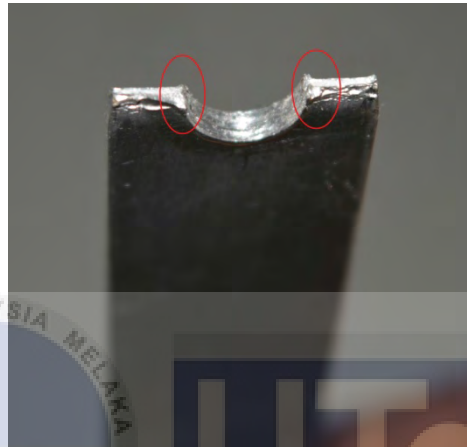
Macroscopic Fracture of a specimen after cold expansion
